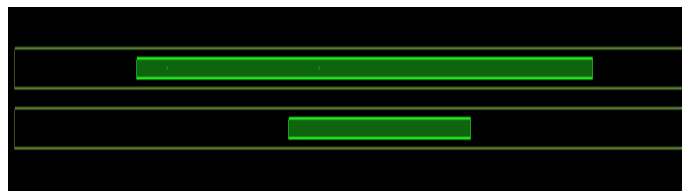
PCB Design of sample stick with $35\ \mu\text{m}$ thick coating of copper to make electrical connection with the sample holder and hold it at place.
